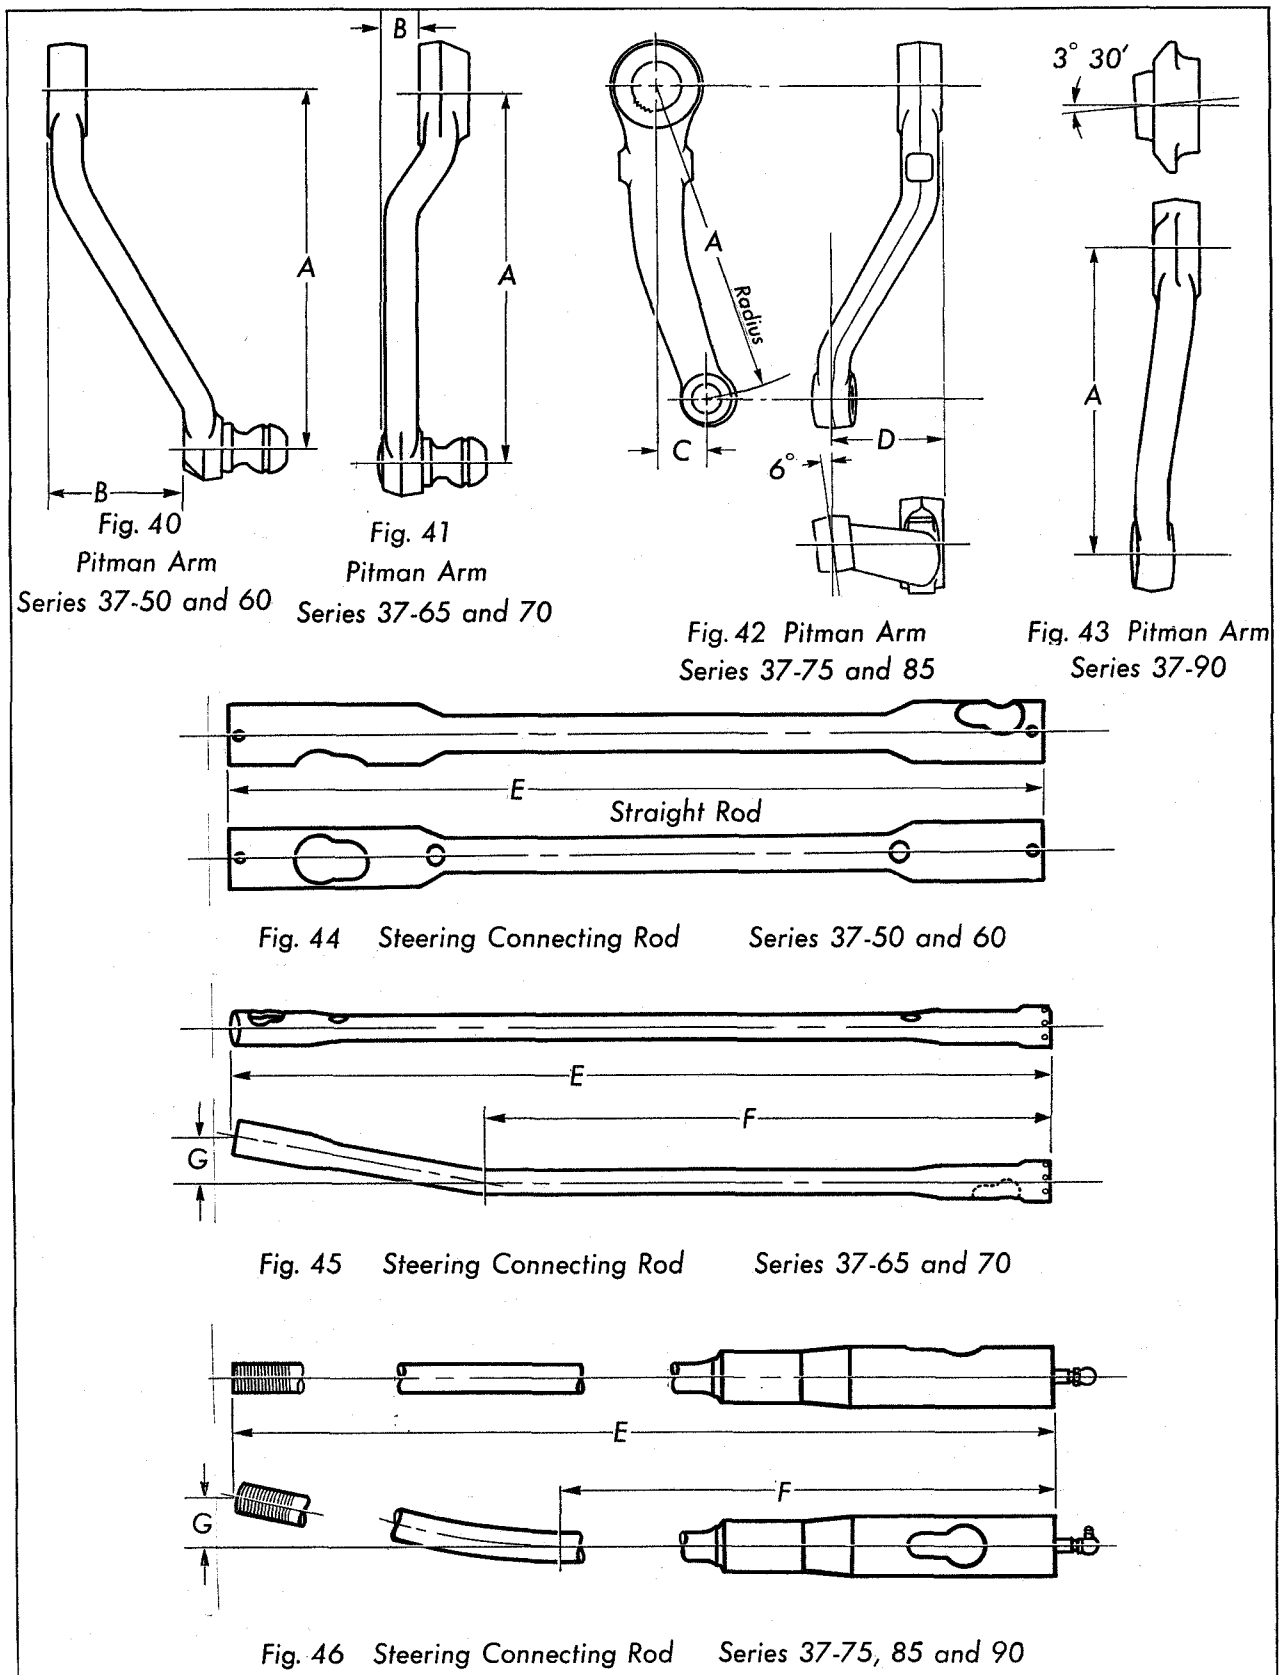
Alignment of Steering Gear Arms and Connecting Rods
